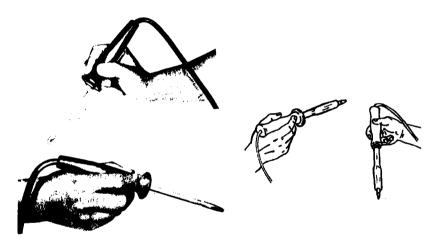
Pencil Grip Method of Holding Soldering Iron
